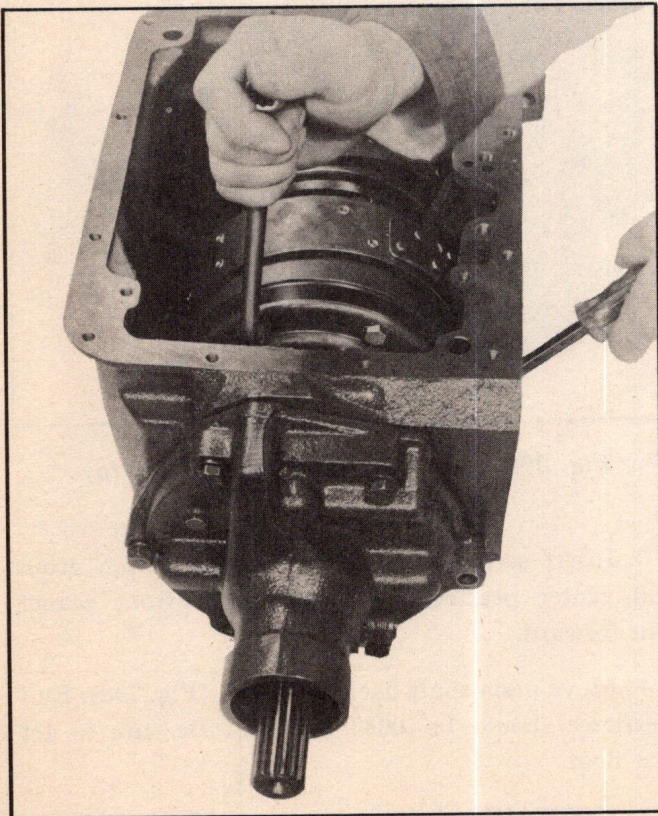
Installing Reverse Drive Flange Attaching Screws
